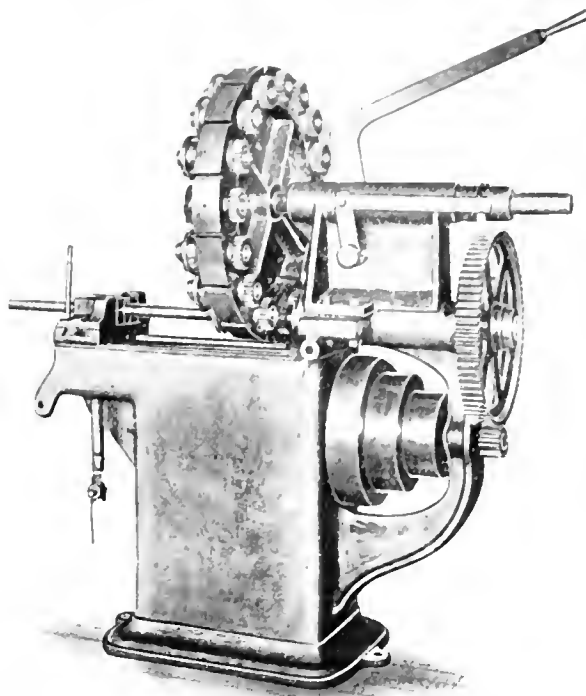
Rear View of the Multiple Die, Threading Machine.
